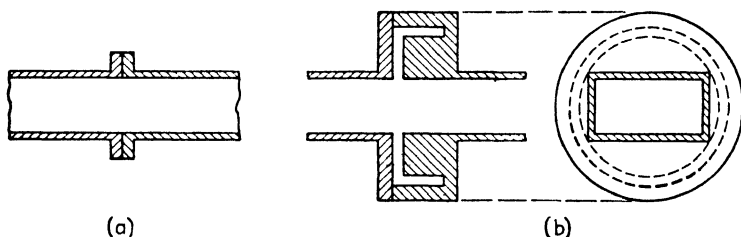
Butt waveguide joint (a) and choke joint (b).
